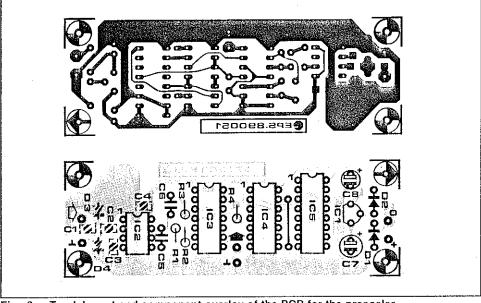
Track layout and component overlay of the PCB for the prescaler.
